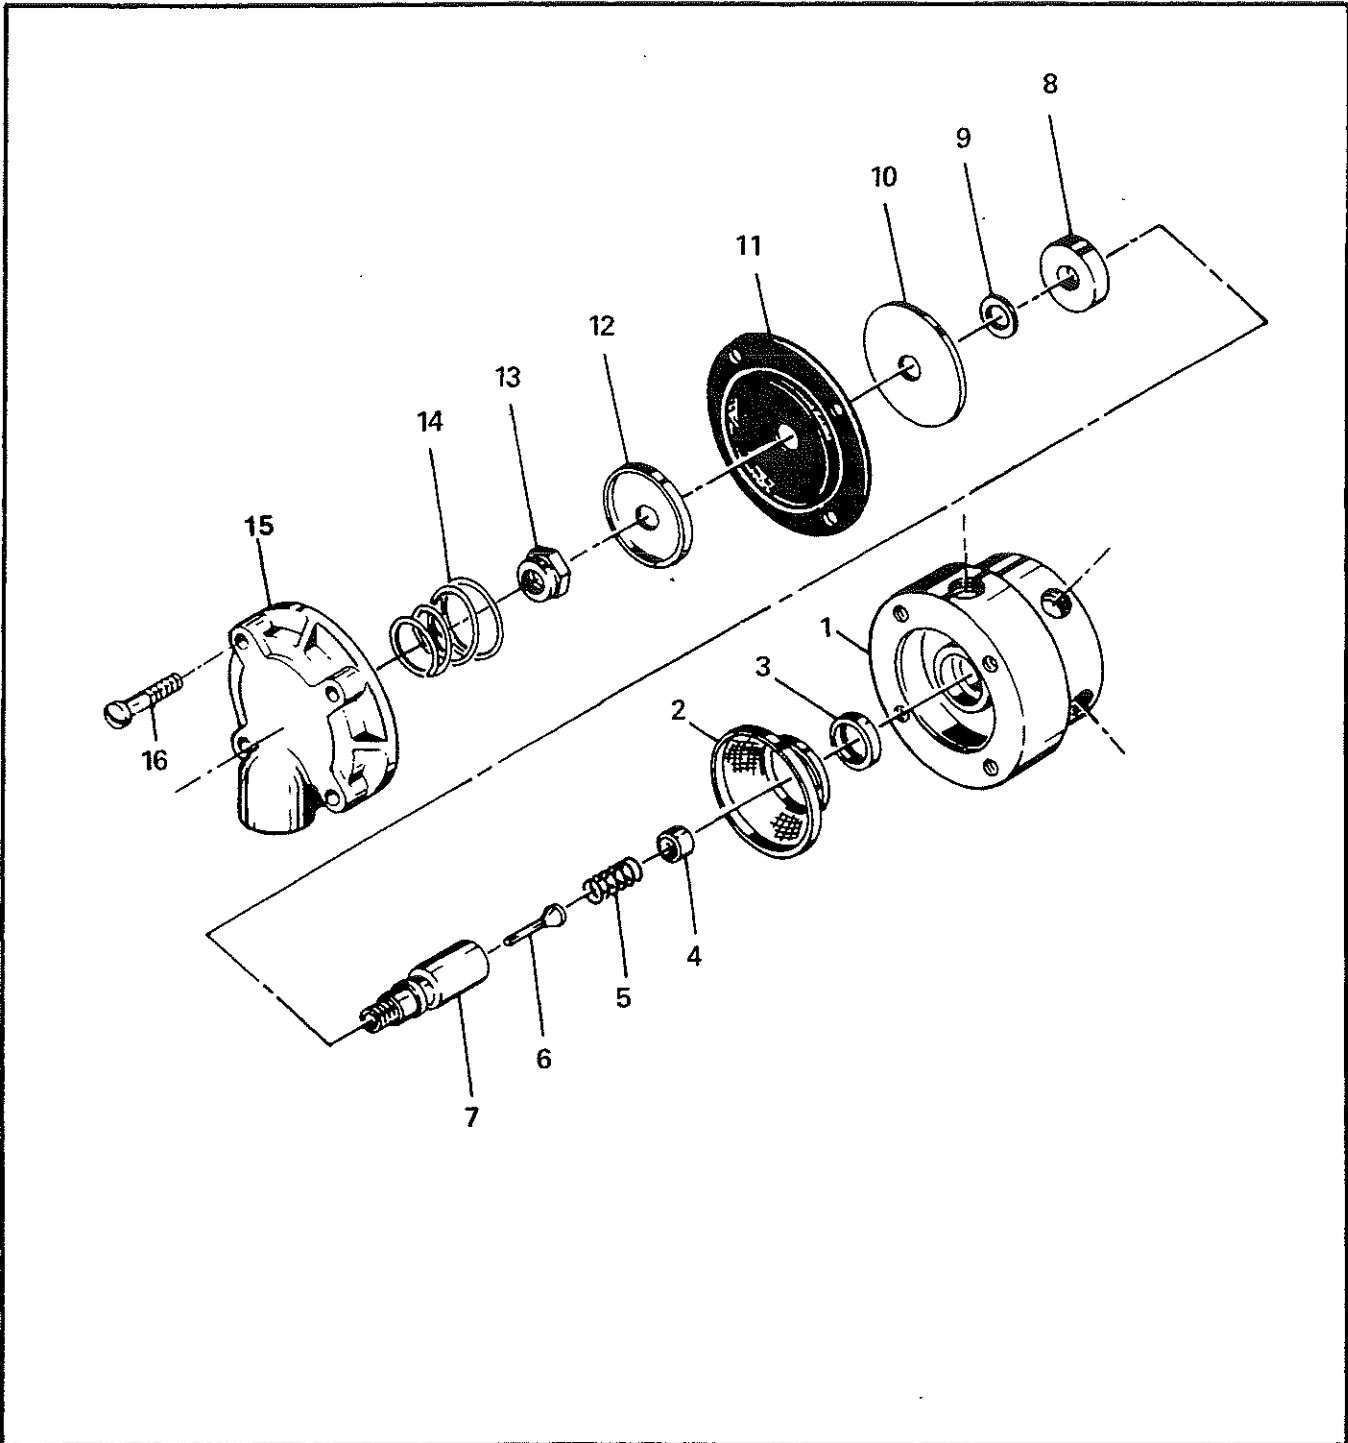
FUEL MANIFOLD VALVE ASSEMBLY.
